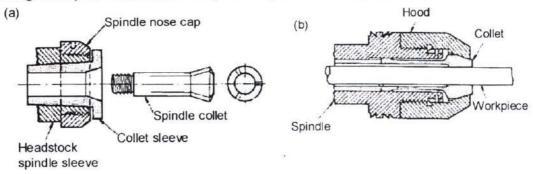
(a) Schematic illustrations of a draw-in type collet. The round workpiece is placed in the collet hole, and the conical surfaces of the collet are forced inward by pulling it with a draw bar into the sleeve. (b) A push-out type collet.
